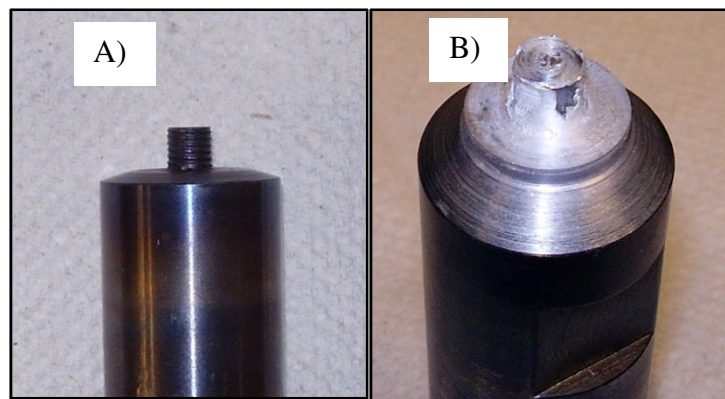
FSW Tools (A) A new .250" diameter threaded pin tool.
